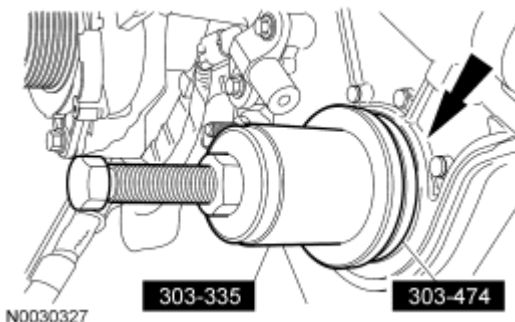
Installing Crankshaft Front Seal Using Special Tools (303--335) And (303--474)
